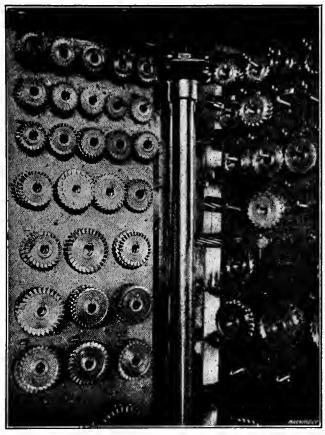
Swinging-leaf Type of Milling Cutter Rack
